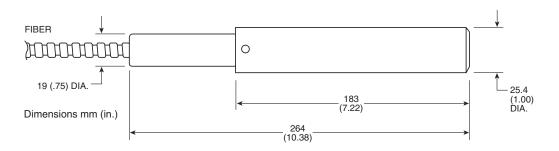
Optical Lens Assembly (L1) .076" @ 6" FOV
